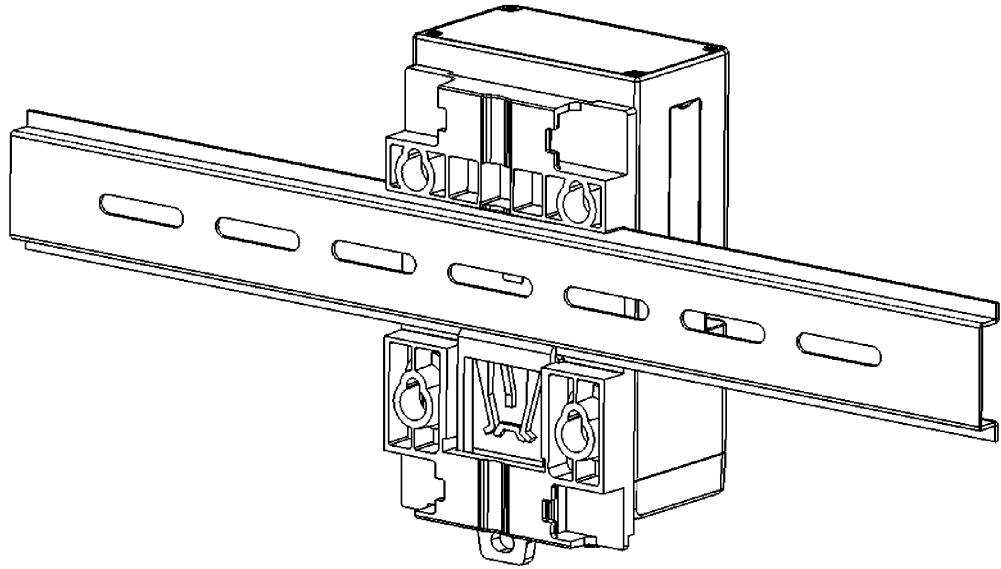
WISE-4471 DIN Rail Mounting (back)
